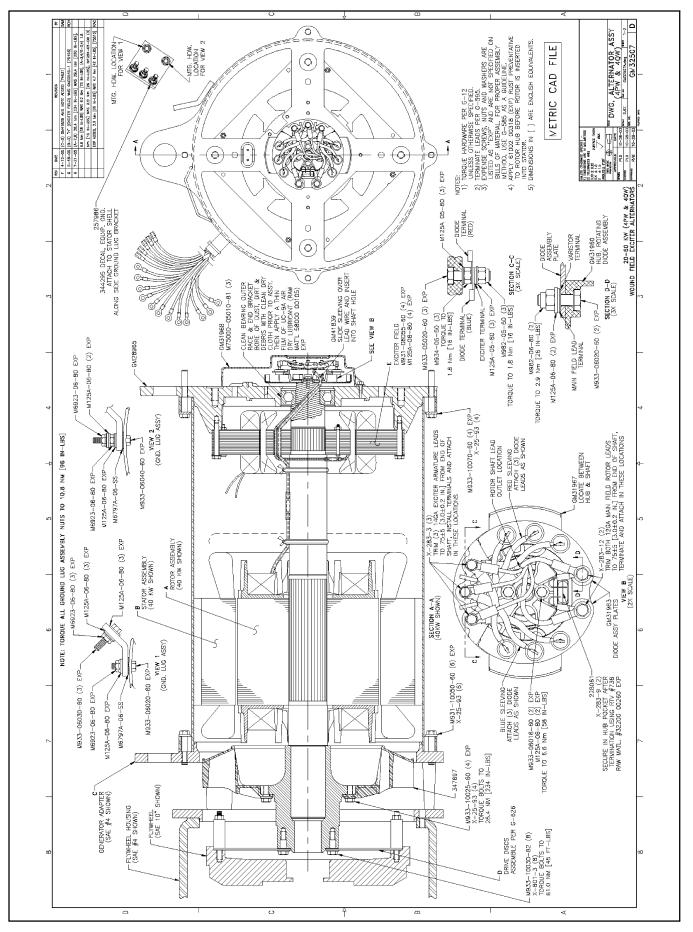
4PW and 4QW Alternator Components, 20-60 kW
